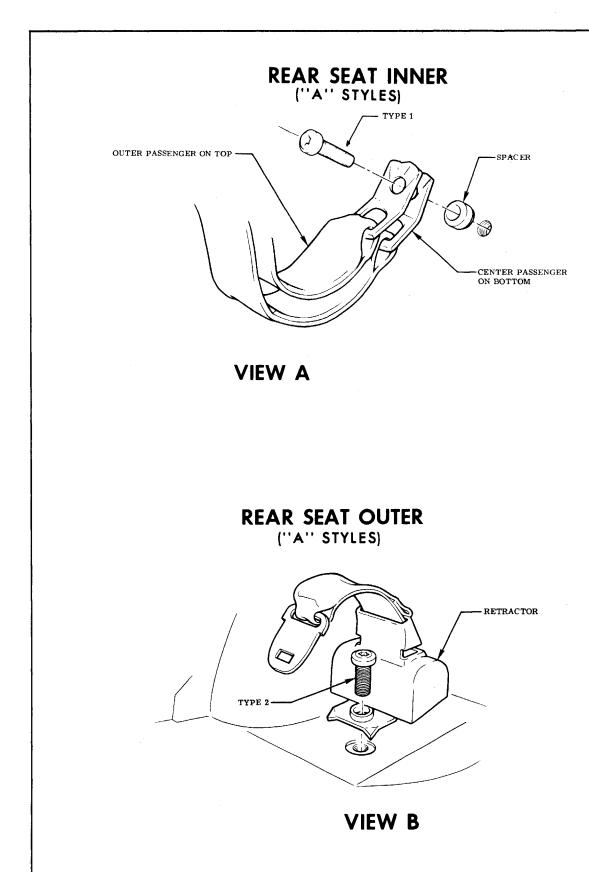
Rear Seat Inner and Outer Lap Belt and Retractors - A Styles
